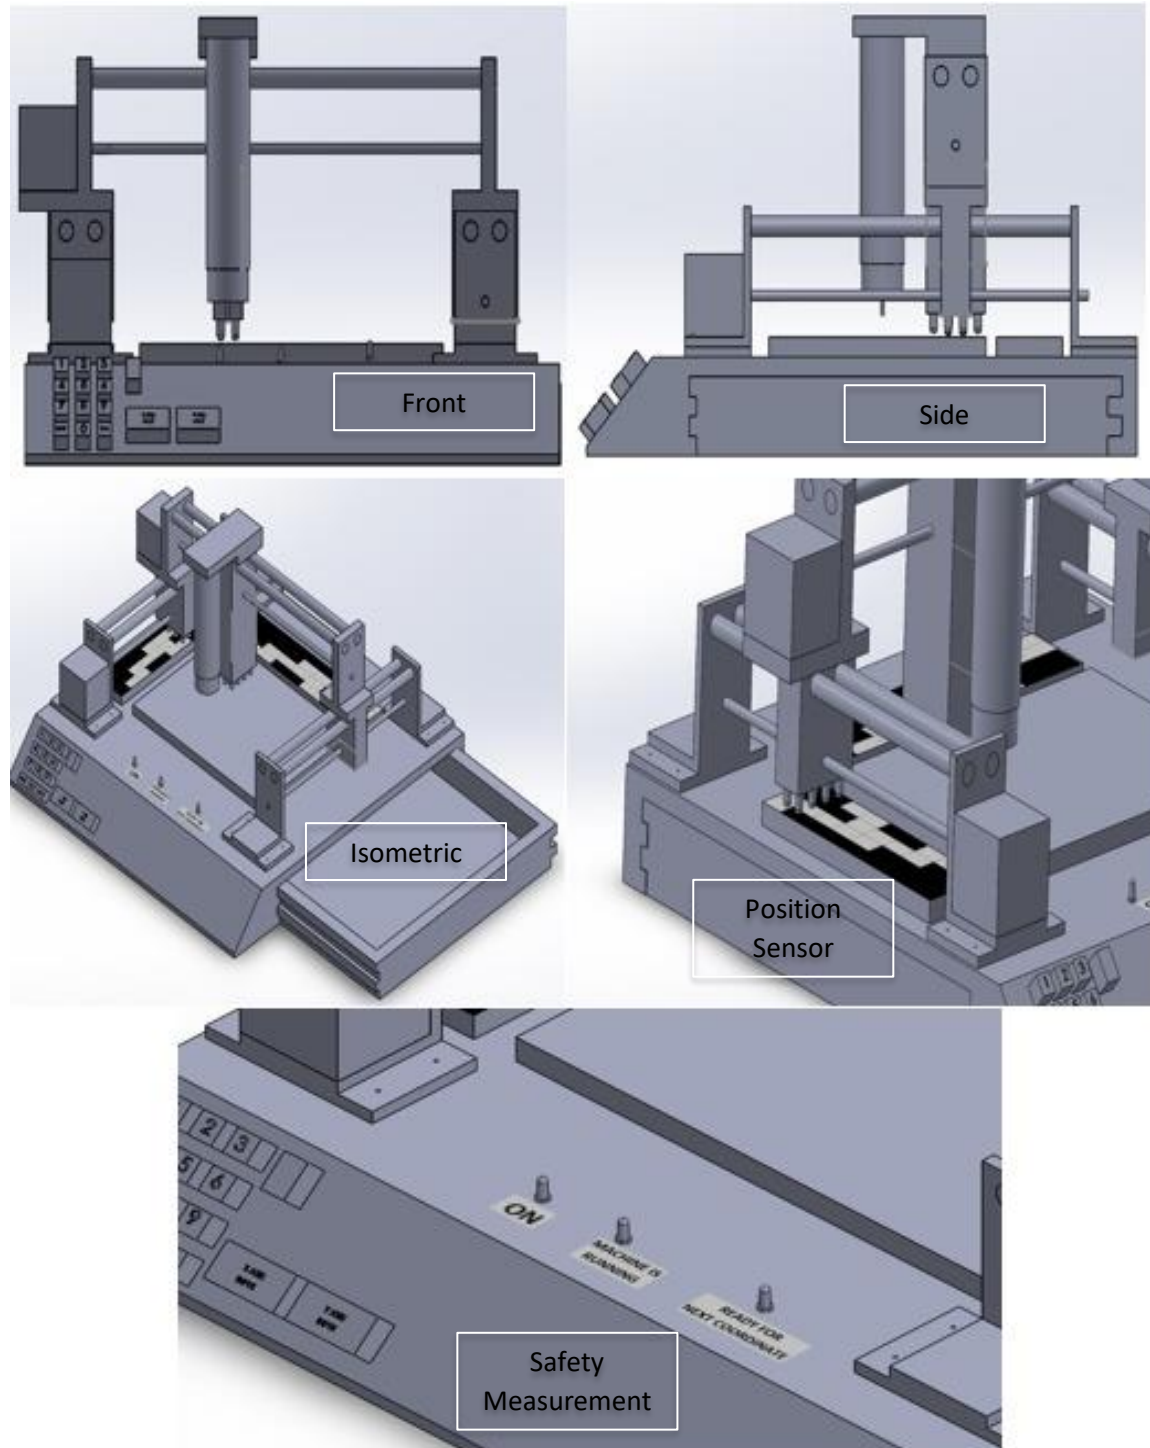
Different views of the PCB Drilling Machine and Safety Measurement button
